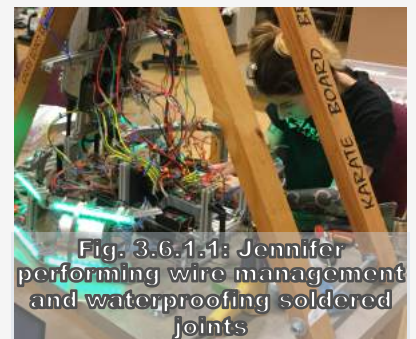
Jennifer performing wire management and waterproofing soldered joints
